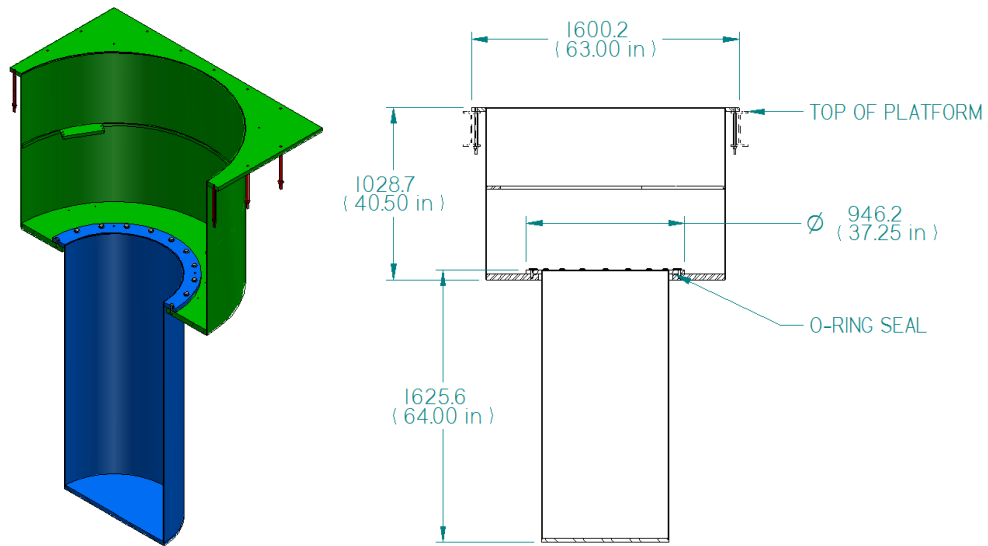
(Left) Support vessel 3D arrangement, showing top (green) and bottom (blue) support vessels. (Right) Support vessel cross-section, showing outside dimensions.
